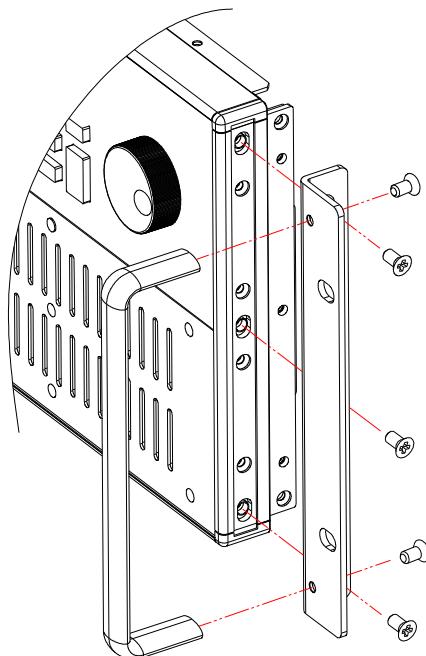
Installing the Rack Mounting Kit & Handle of 62050P
